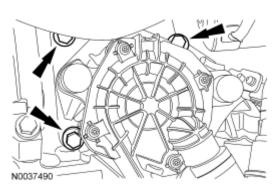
Locating Engine Mount Bracket Bolt And Nuts Courtesy of FORD MOTOR CO.
